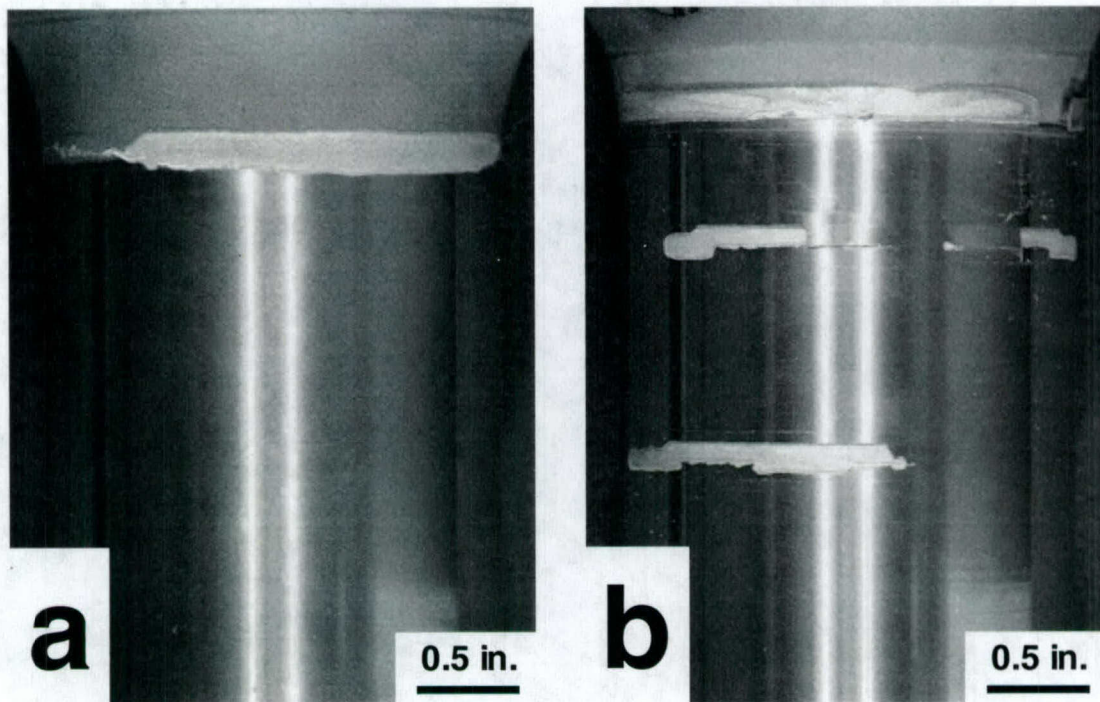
Morphology of spalling exhibited by HVOF coatings in axial fatigue tests at $R = -1$: (a) specimen HVOF 8 (0.0055 in. coating), stepped stress test to 180 ksi and (b) specimen HVOF 4 (0.0055 in. coating), stepped stress test to 200 ksi (spalling failure near the end of the gage section) followed by testing at 210 ksi (spalling failure in the gage section).
